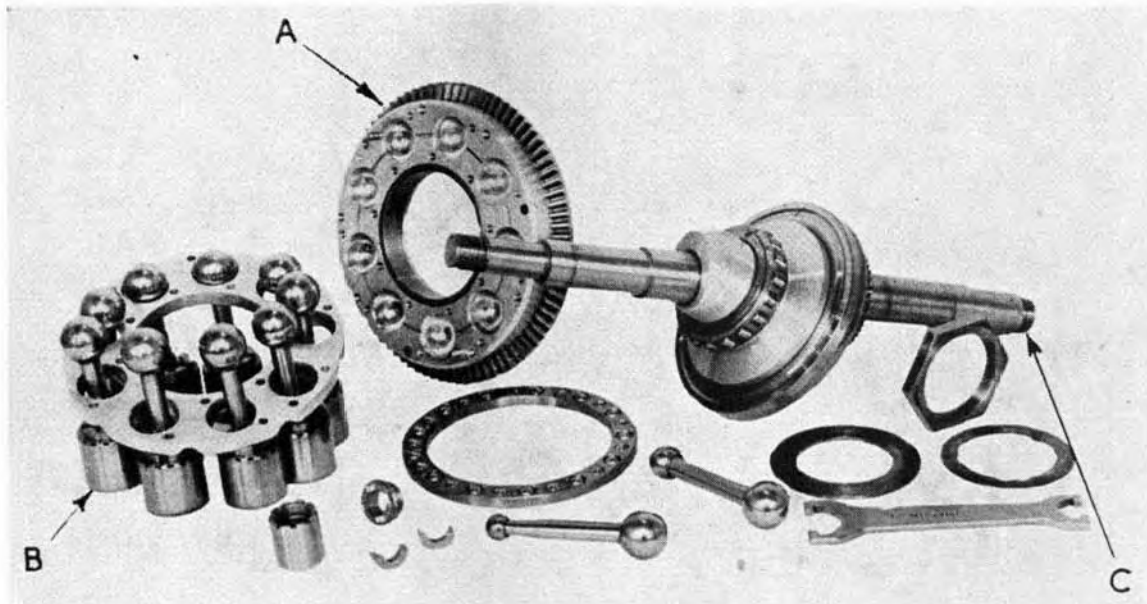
“ G ” TYPE MOTOR FOR A.R.L. POWER DRIVE
